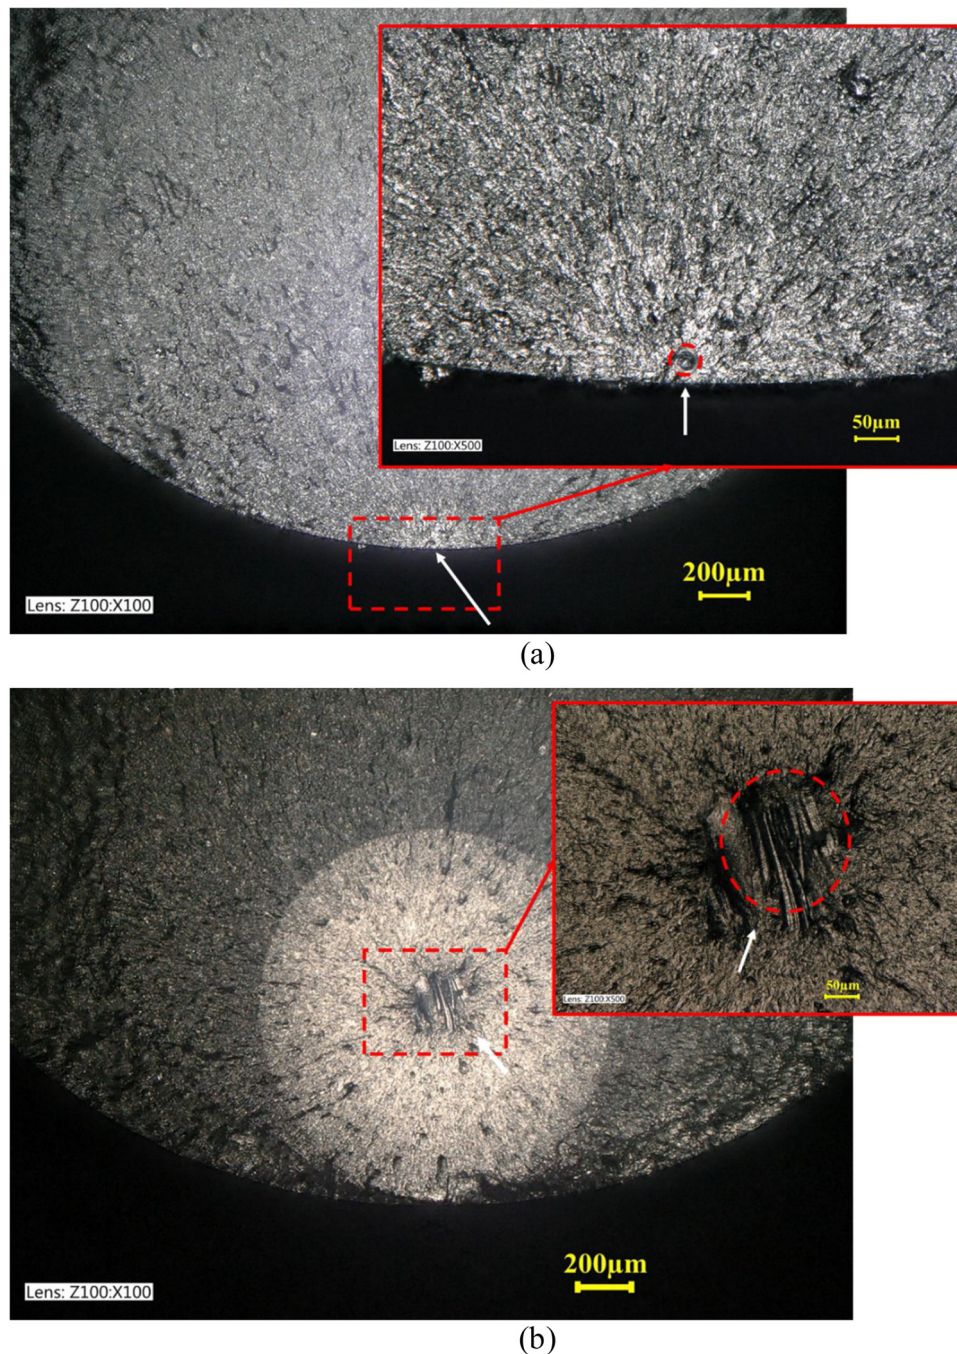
Fracture surfaces of LB-PBF CA-H1025 17-4 PH SS specimens in machined surface condition fabricated from (a) Batch 1 and front with 1,747,292 reversals to failure, and (b) Batch 1 and back with 100,492 reversals to failure, both tested at 0.0025 mm/mm strain amplitude.
